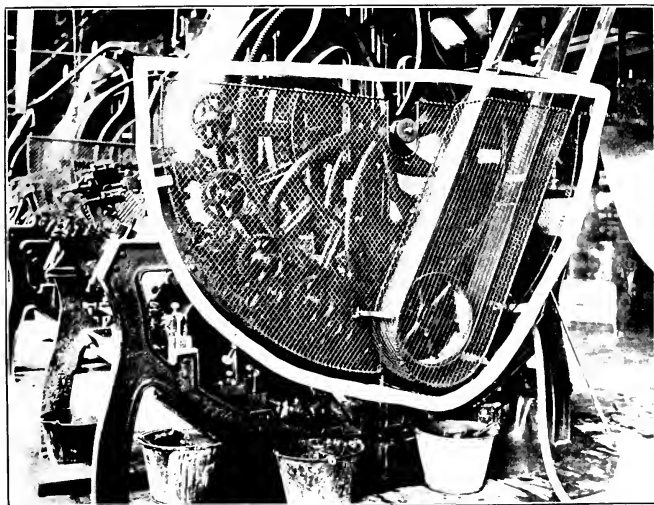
Illustration No. 12. Wall paper printing press with inclosed cylinder gears and drive belt and pulley.
